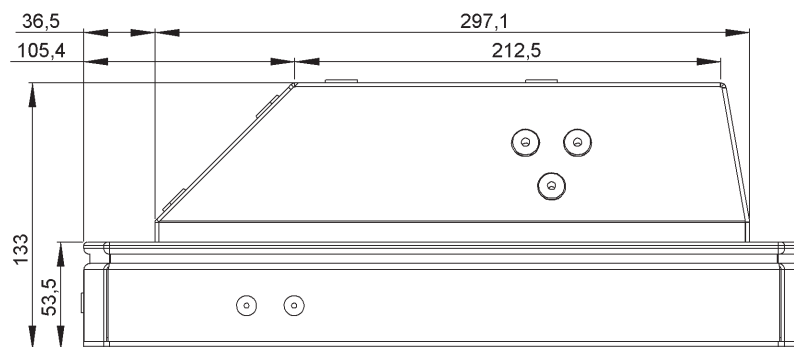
Unit depth, S15-G2 stainless steel enclosure (all dimensions in mm)
